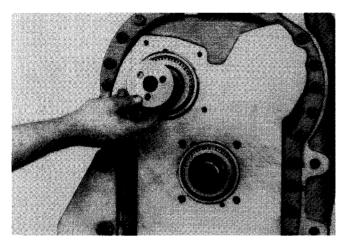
Install low (1st) clutch rear bearing retainer plate. NOTE: Inner diameter hole chamfer to go toward bearing.
